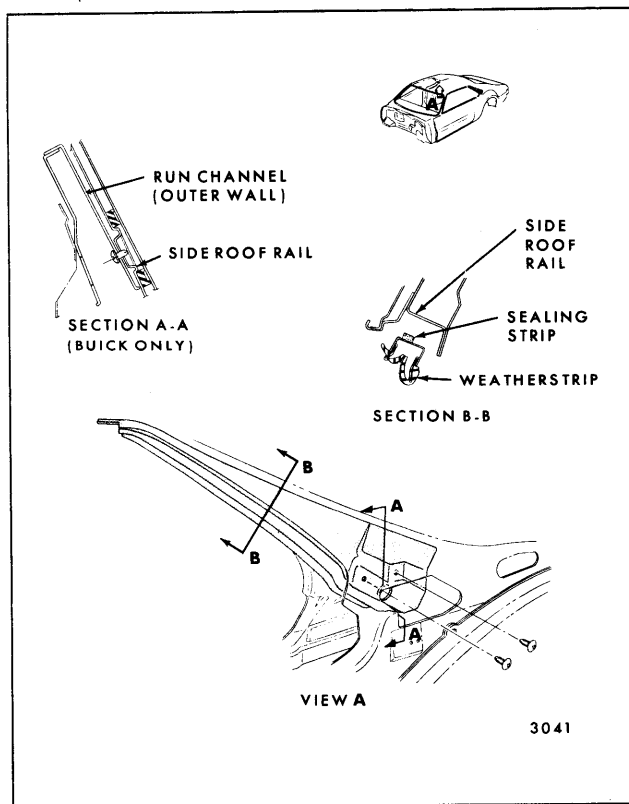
Side Roof Rail Weatherstrip Assembly - "E-87" Styles
